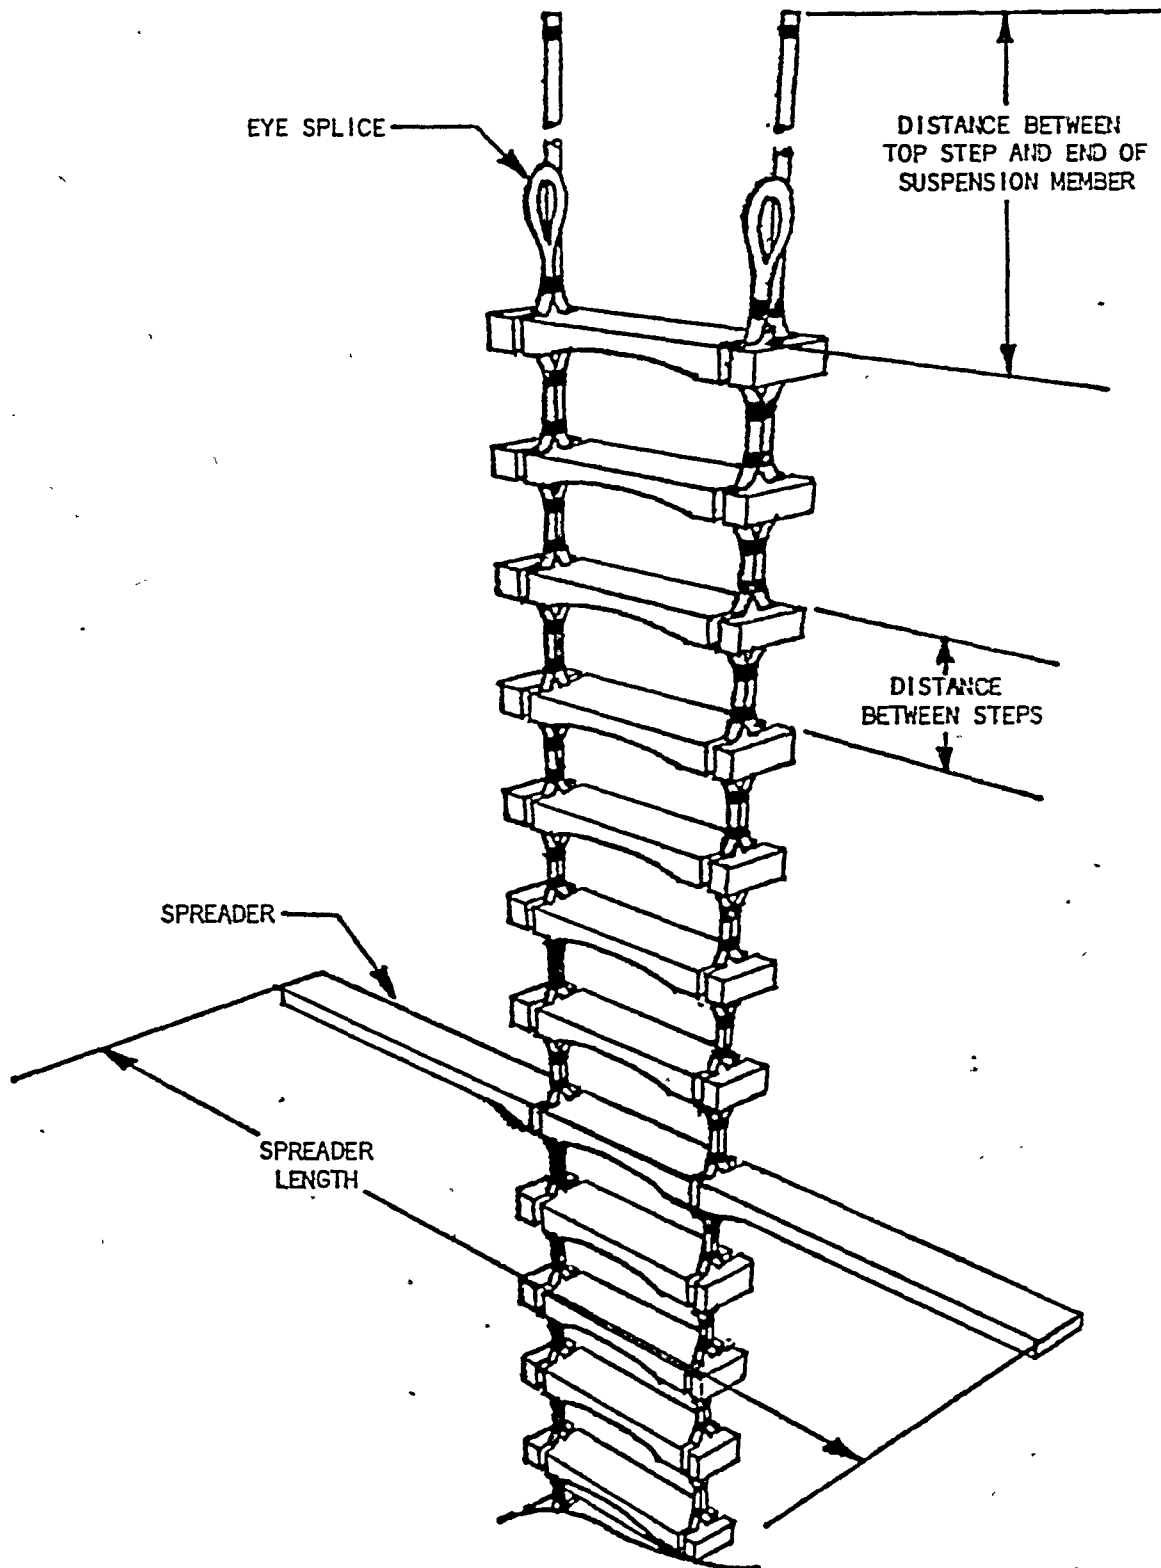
(a)(1) TYPICAL PILOT LADDER ARRANGEMENT.
